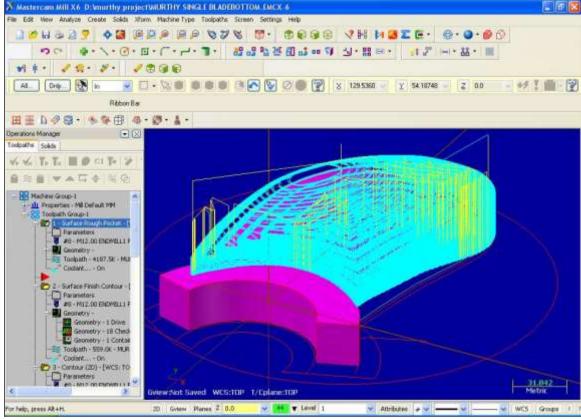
Tool Path Generation for Bottom Roughing of Blade.
